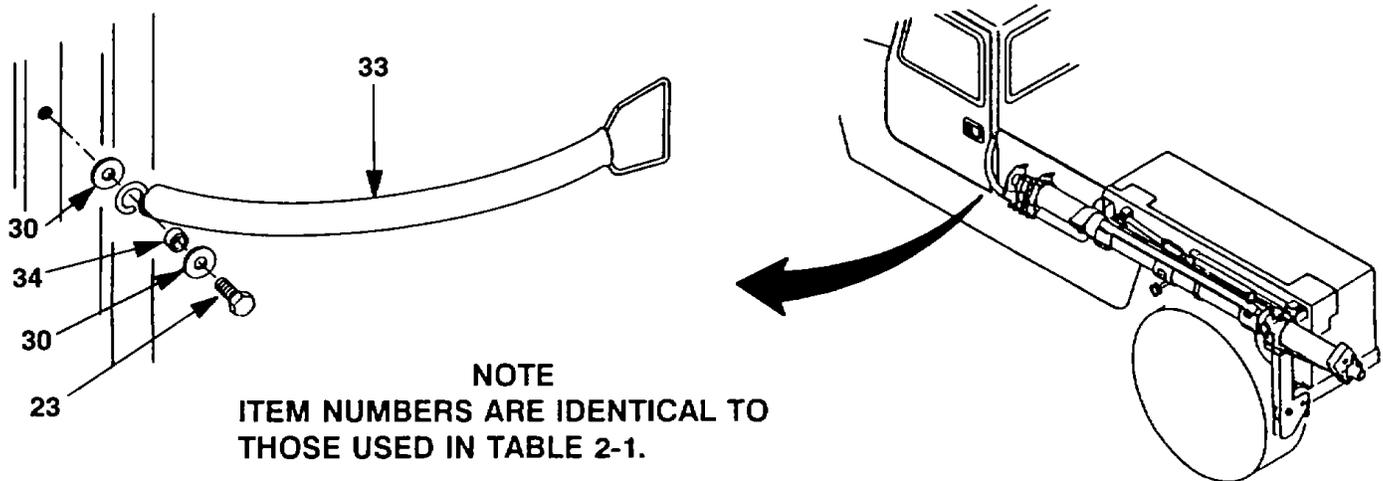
Universal HMMWV Mounting Kit and Mast Installation (Sheet 4 of 4)
